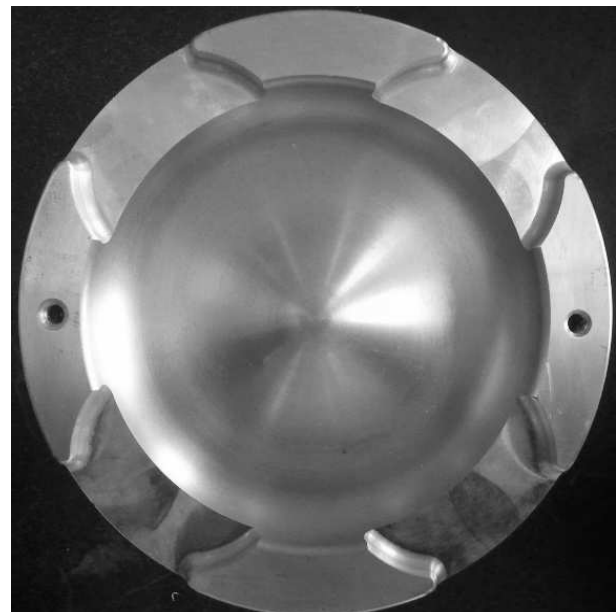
Variable fillet piston avoidance valve pit surface contour finishing actual machining results
